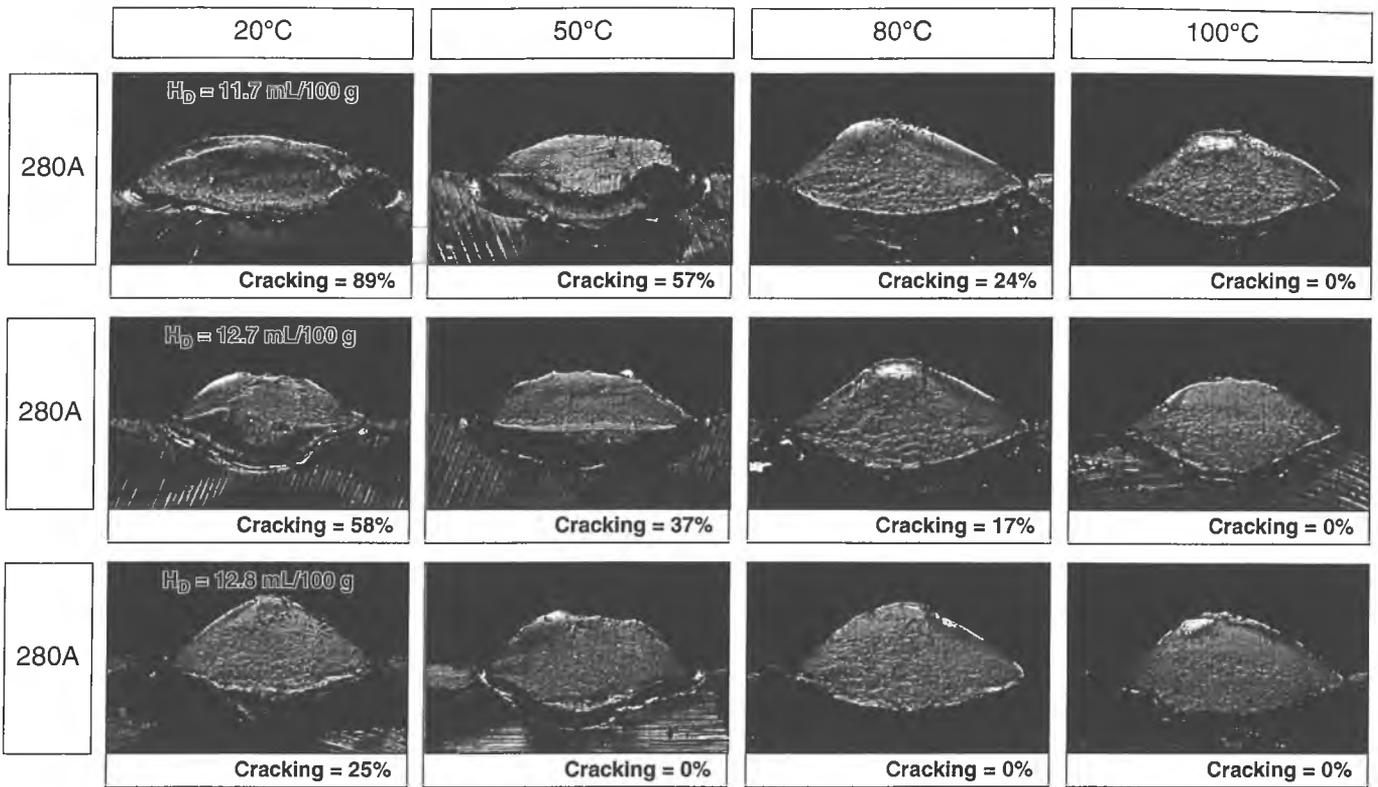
Macrographs showing the G-BOP fracture faces with cracking percentage of H10 weld metal deposited at preheat temperatures of 20, 50, 80 and 100°C using CO₂ shielding gas and a CTWD of 15 mm.
